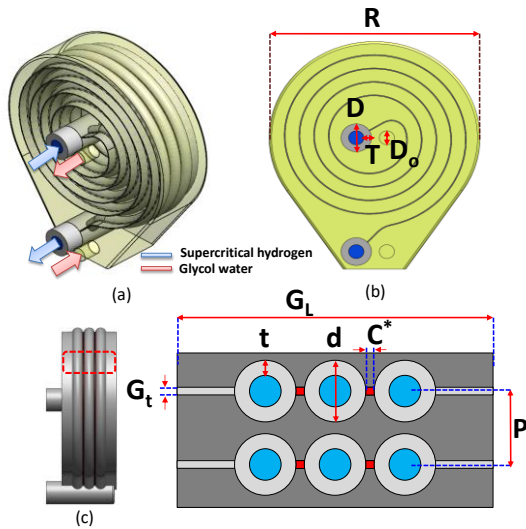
Helical heat exchanger geometry shape and dimensions (a) 3D view & flow vector (b) Front view(c) Coil inside cross section
